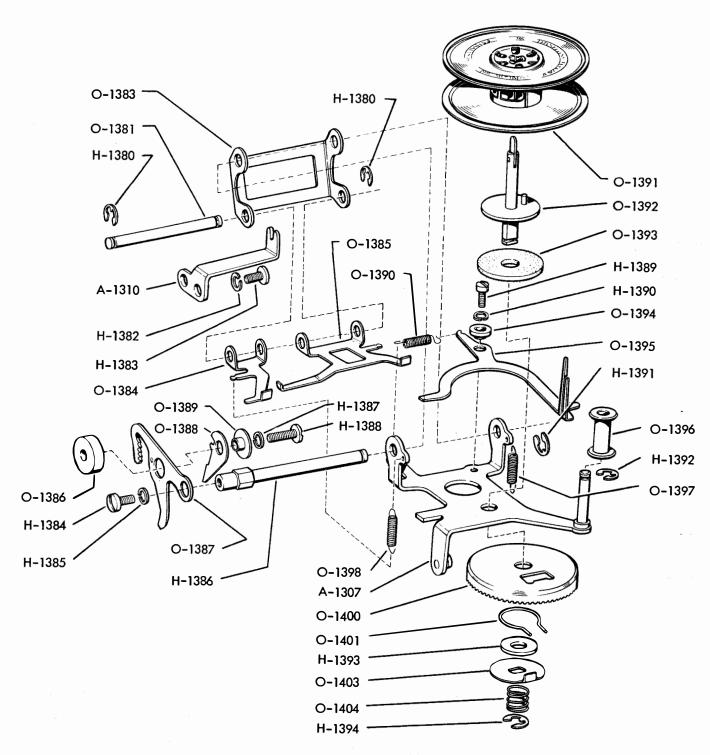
Automatic Typer, Right Ribbon Feed Mechanism
